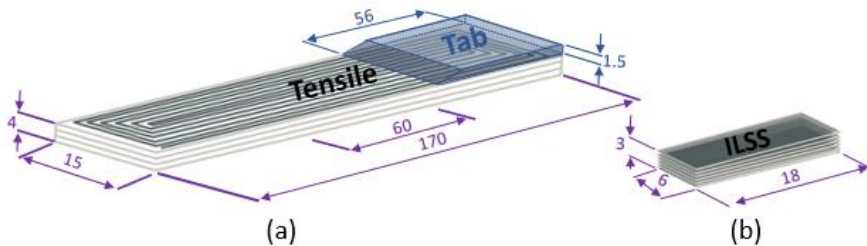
PLA-SSF 3D printed (a) Tensile sample and tab dimensions and (b) ILSS dimensions
